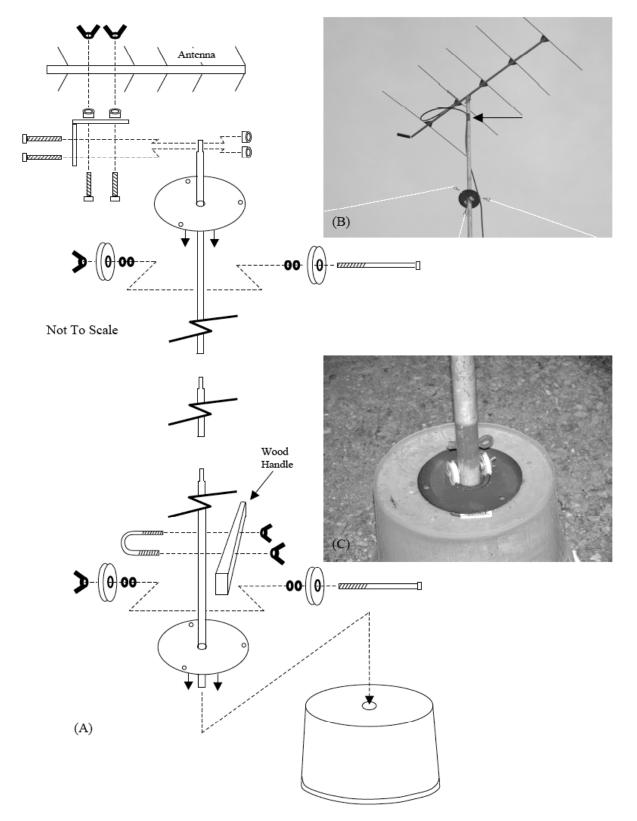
An inexpensive tower for radio-telemetry. A) Assembly schematic for a 30-ft tower. B) Photograph showing antenna, top support disk and axle, and use of electrical tape (arrow) to secure antenna cable to tower. C) Photograph showing the lower support disk and axle on the bucket.
